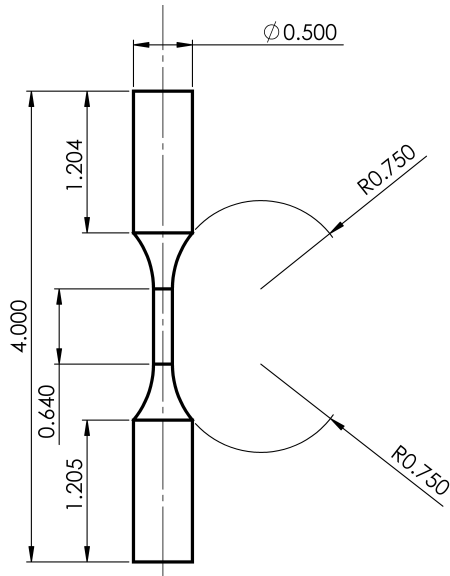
Fatigue specimen geometry based on ASTM E466 round, constant gauge section diameter specimen design
